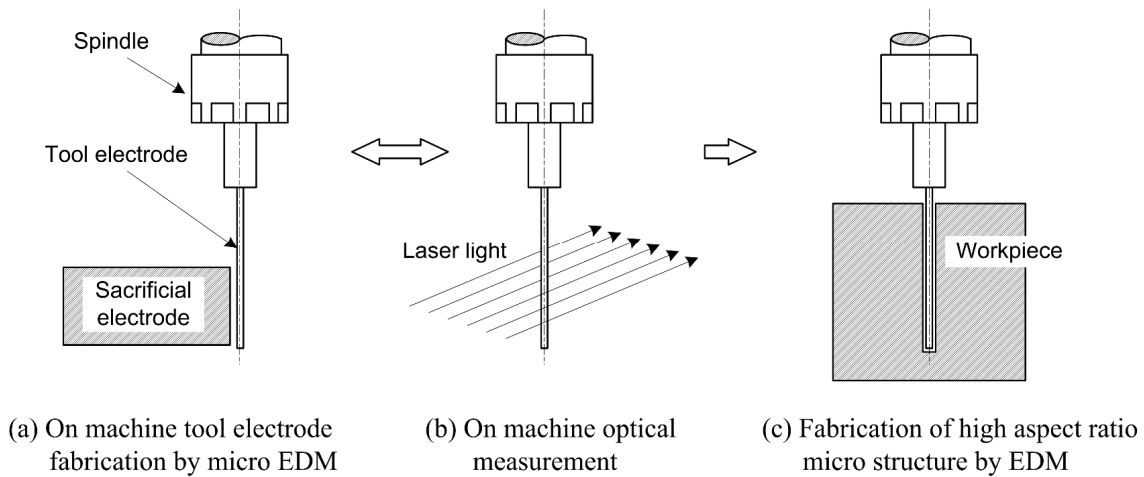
Micro EDM with on-machine tool fabrication, and on machine tool inspection steps in DT – 110 machine.[9]
